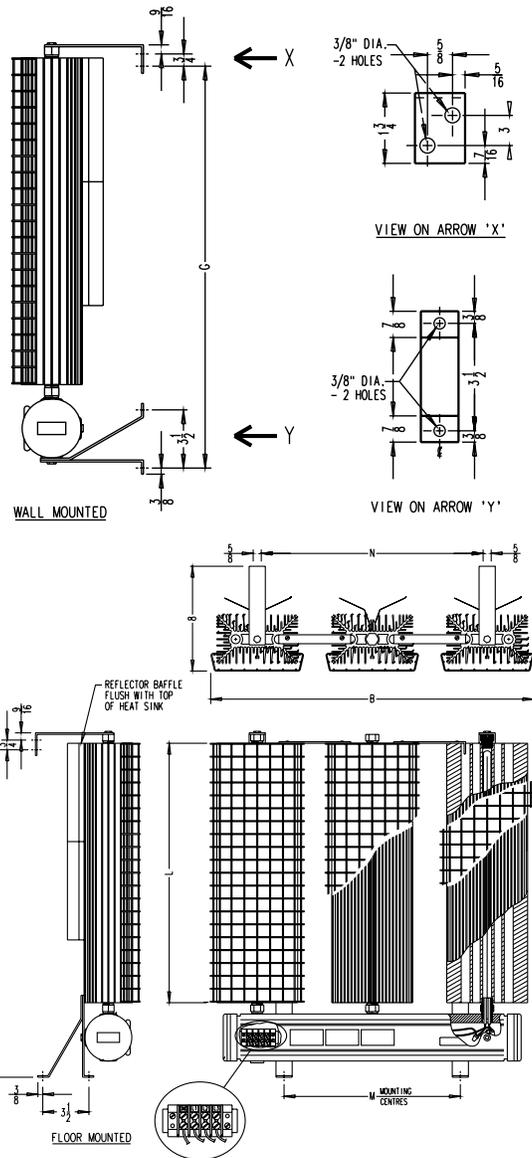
DIMENSIONS & MOUNTING DETAILS
